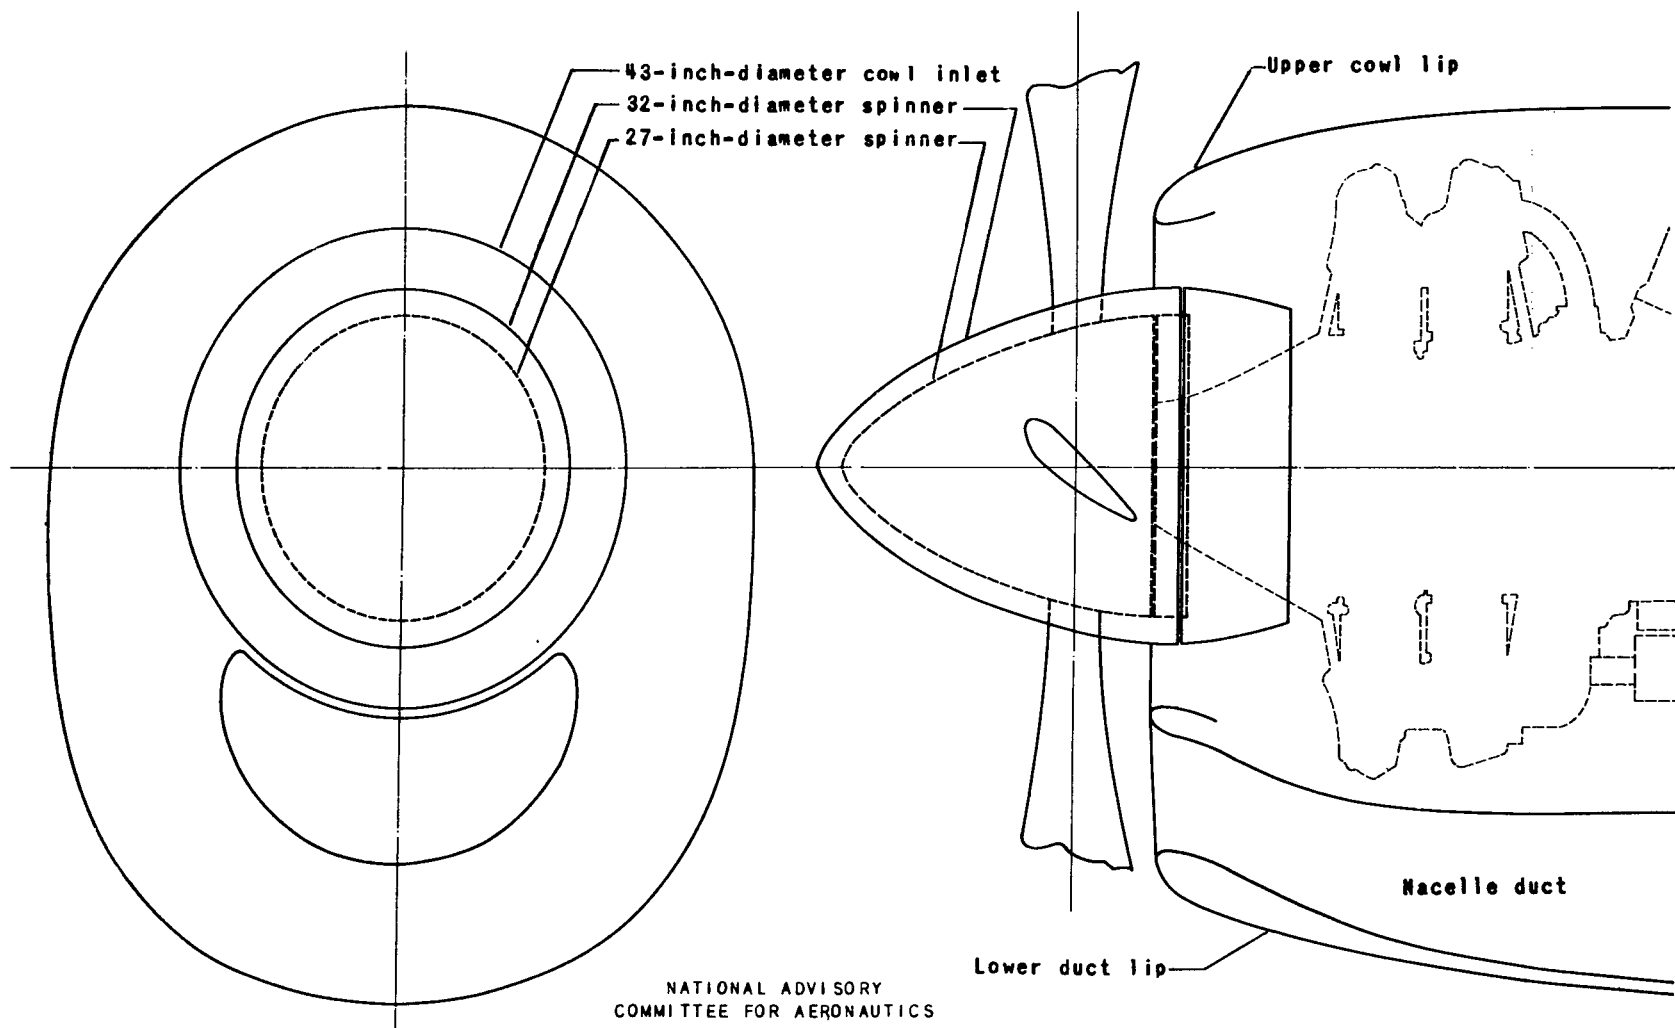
Composite drawing showing 27-inch-and 32-inch-diameter propeller spinners installed on a 43-inch-diameter cowl inlet.
